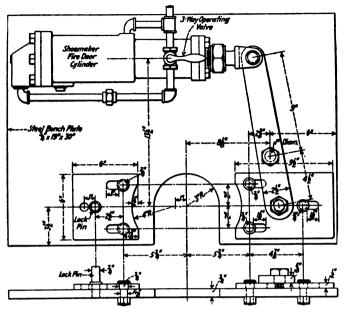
A Power Vise for Holding Freight Car Piston and Non-Pressure Head While Changing the Packing
